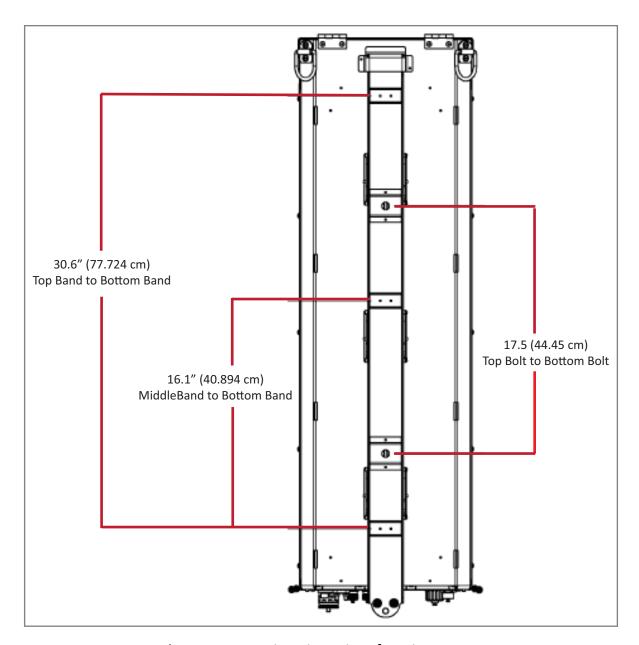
Mounting Dimensions for Tri-Bay PRUs
